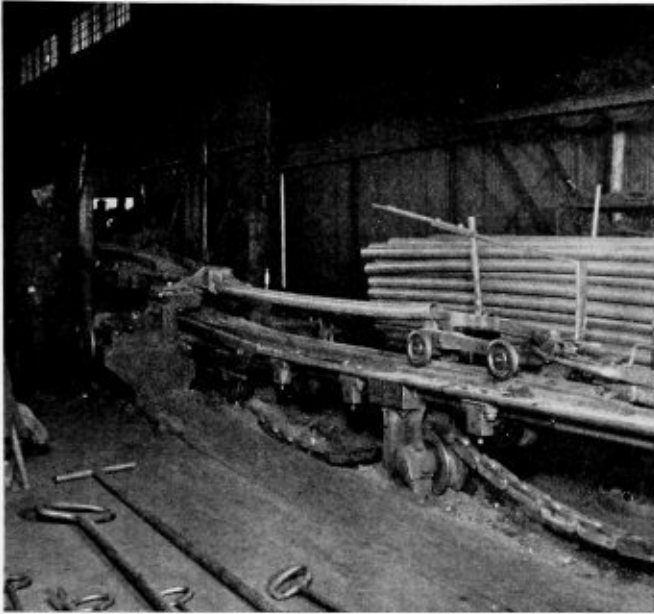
The Heated Skelp Is Drawn Through Dies to Give It a Cylindrical Shape
